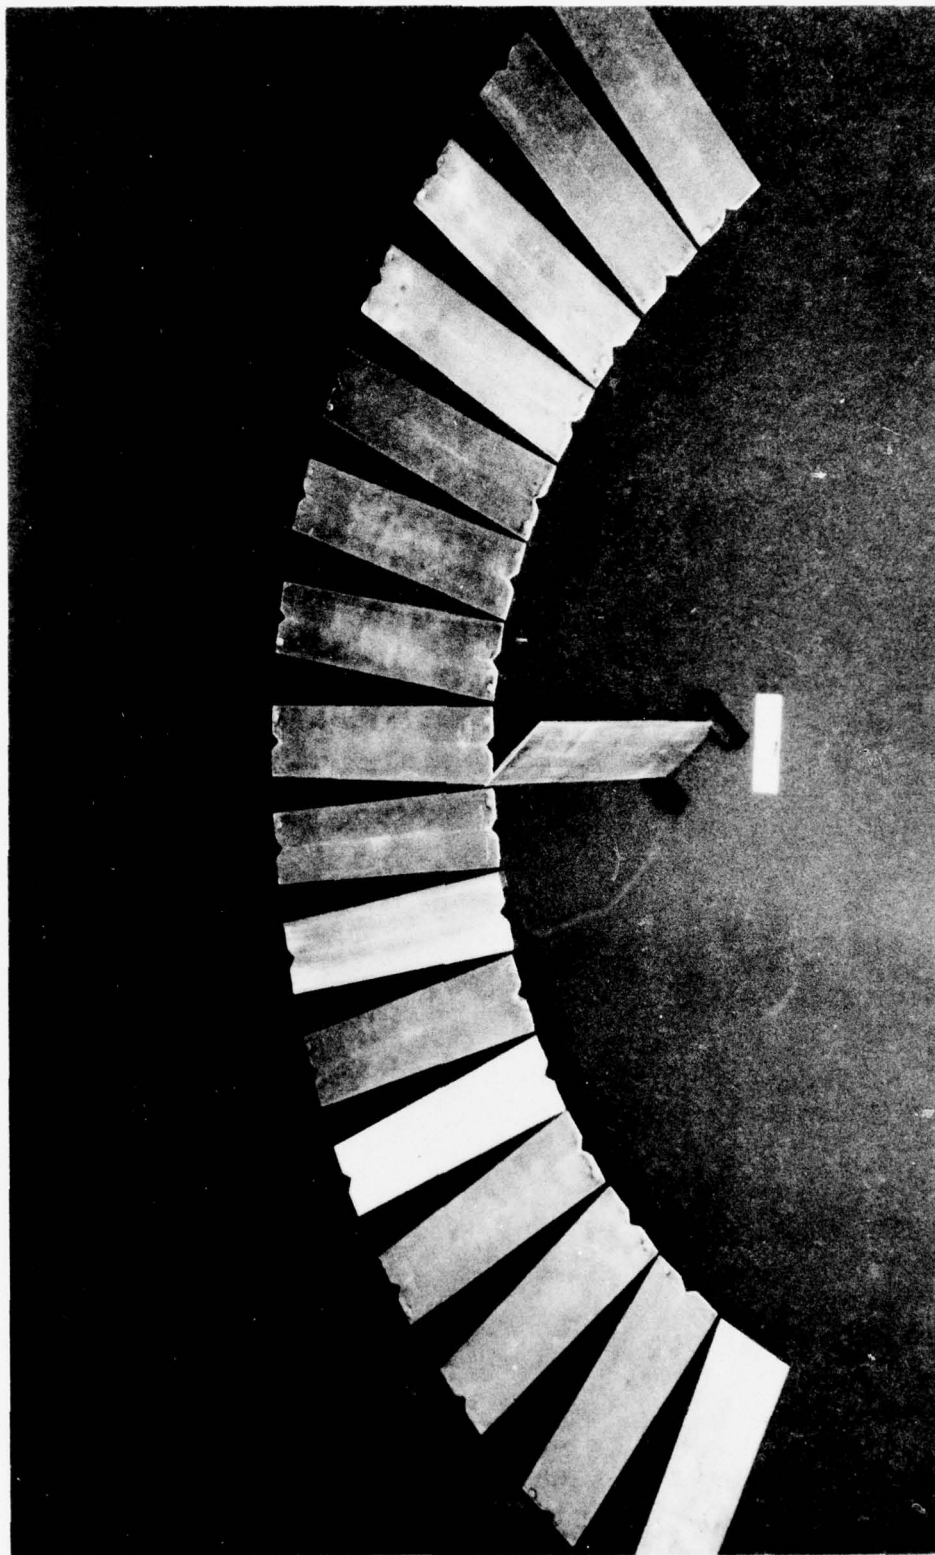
Air Bonded Blakelike Shape Specimens Produced for F00 Testing.
